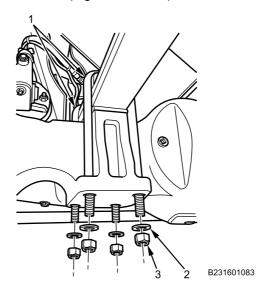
Front Shock Absorber Lower Mounting Bracket Installation, U-Bolt Locknuts and Washers.
